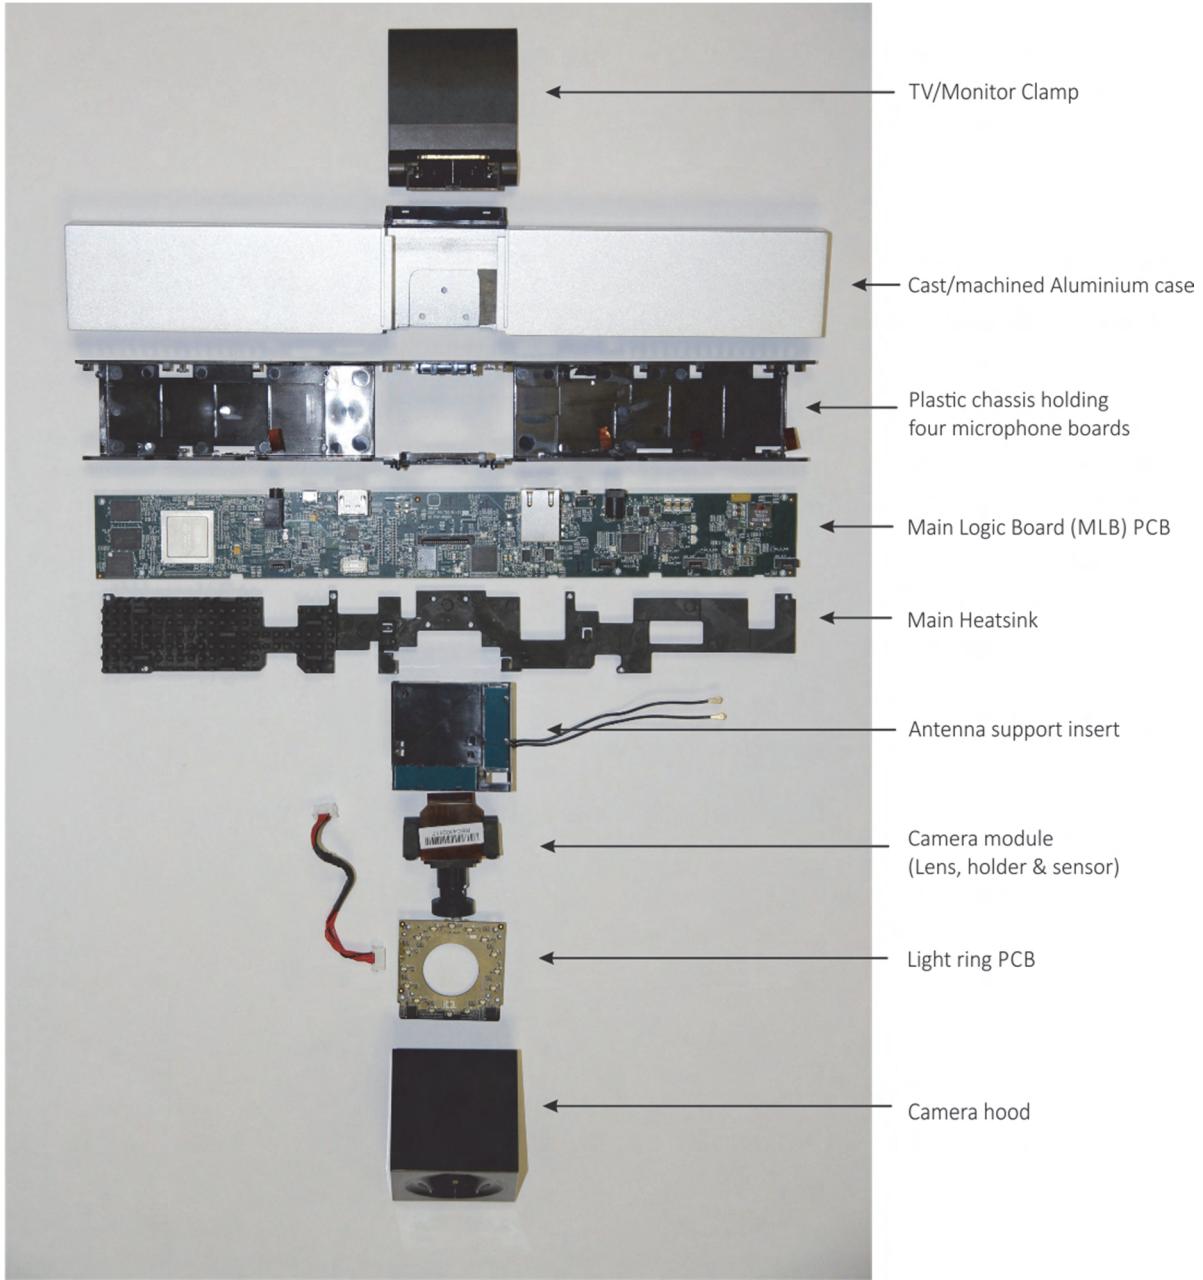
Internal sub-assemblies showing mechanical and electronic parts
